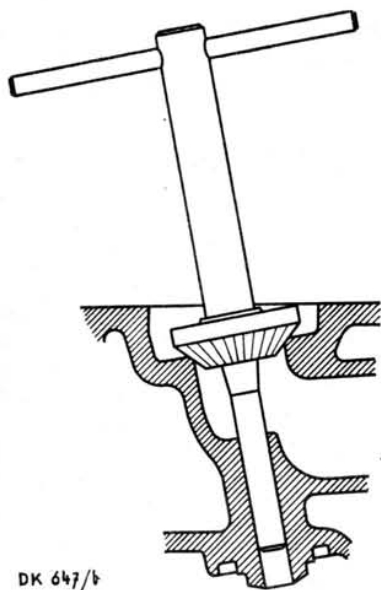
/5 - Milling Valve Seat - Milling Cutter Position
